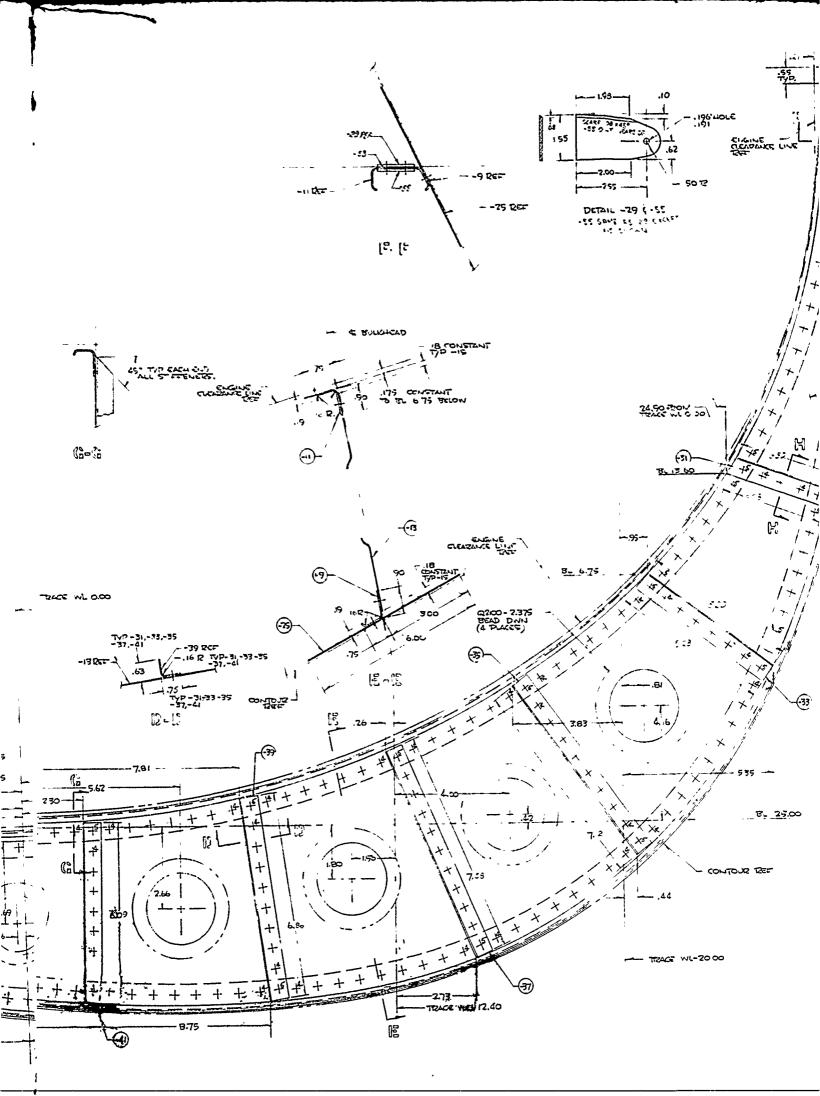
FUSELAGE CANTED BULKHEAD; Riveted Assembly - Engineering Drawing 29-01004, Sheet 2 of 2
